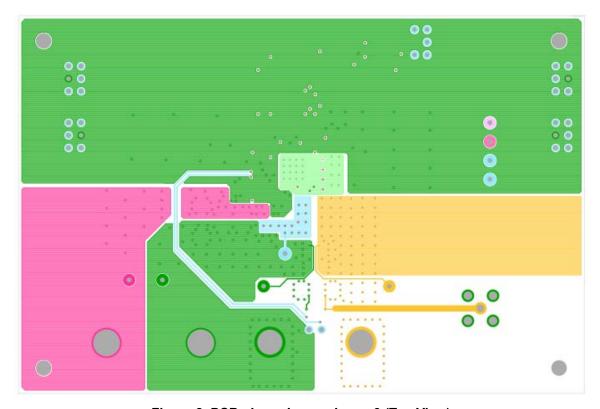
PCB - Inner Layer - Layer 3 (Top View)
